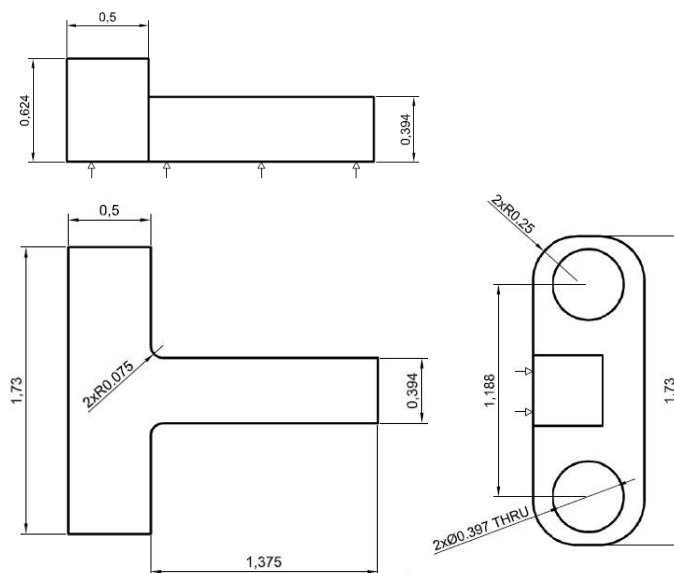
T-shape coupon used for LIE test. Dimensions are in inches. The arrows indicate the burnished surface.
